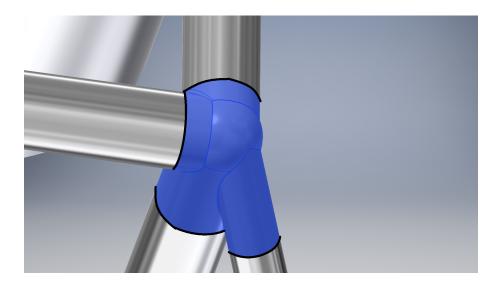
Weldments on insert, dark lines are weldments and the insert is colored blue for better vision.
